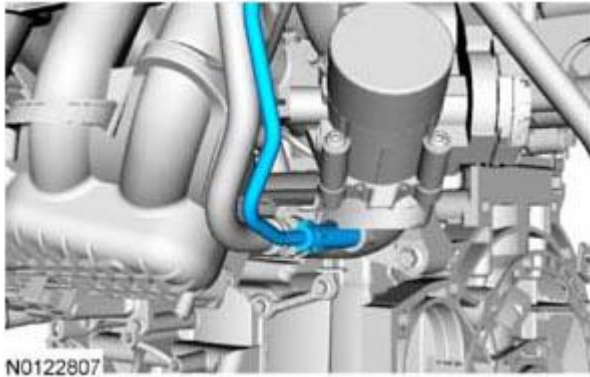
Identifying Evaporative Emission (EVAP) Canister Purge Valve Tube To Intake Manifold
